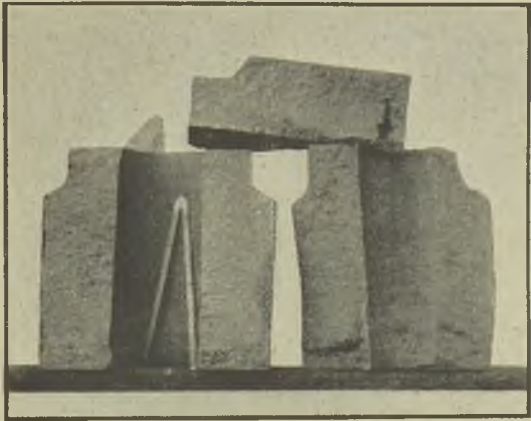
THE HEAD OF THE CASTING SHOWN IN FIG. 5 SPLIT OPEN.
